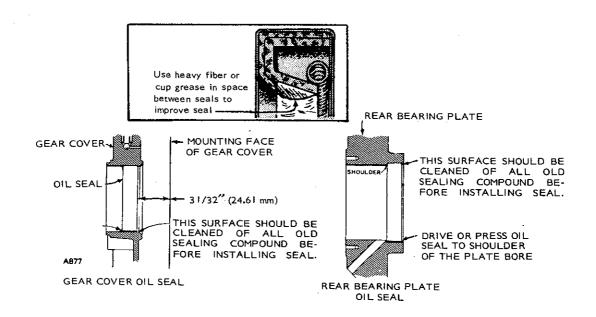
GEAR COVER AND REAR BEARING PLATE OIL SEALS
